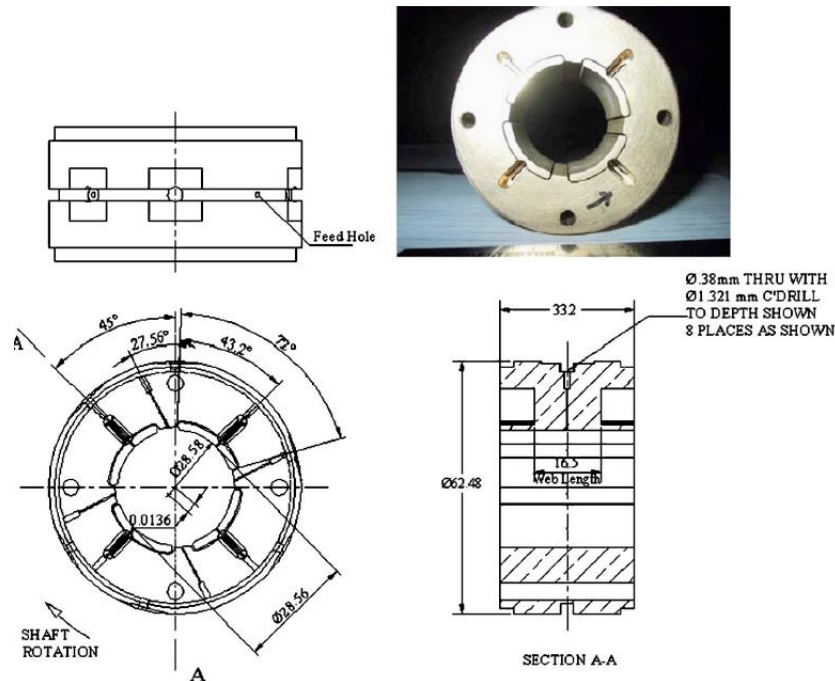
Flexure pivot hybrid gas bearings designed by Zhu and San Andrés [0]
